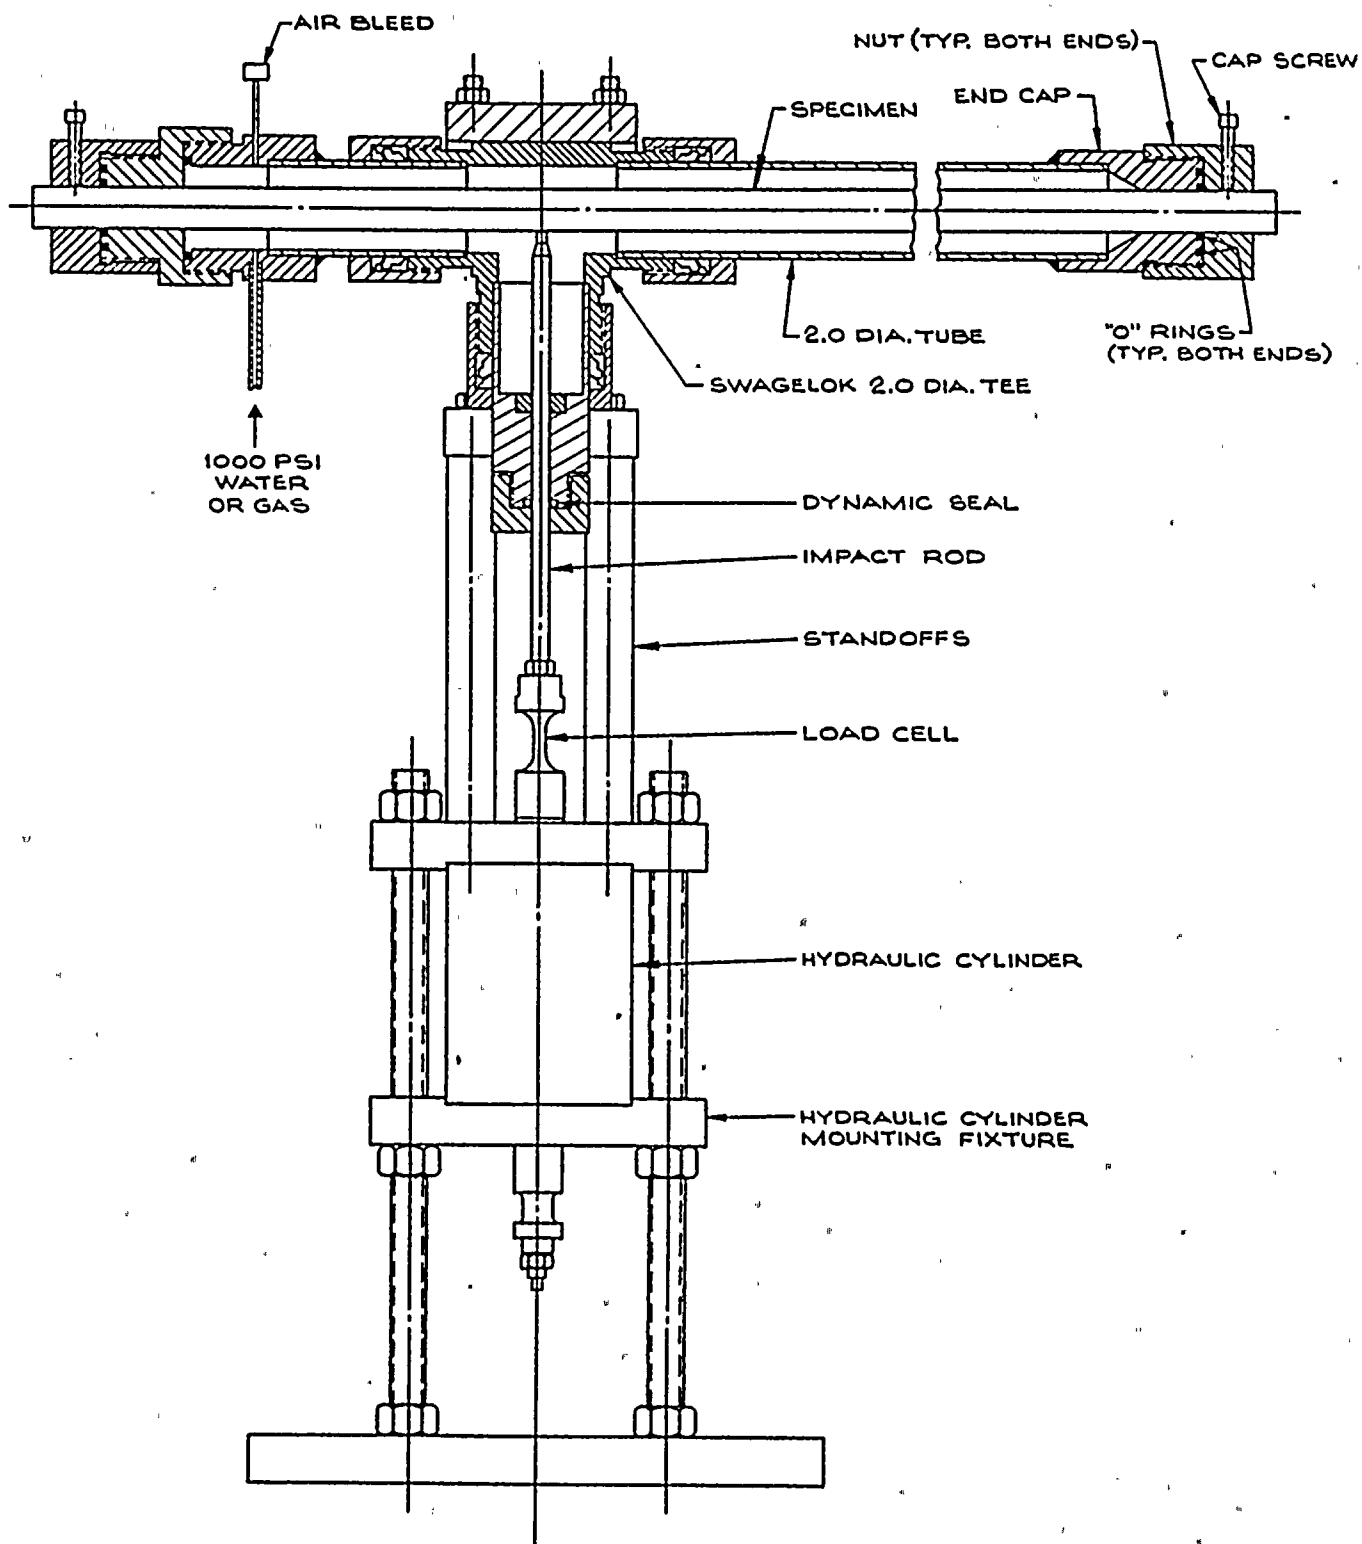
Test Fixture for Dynamic Collapse of Steam Generator Tubes
